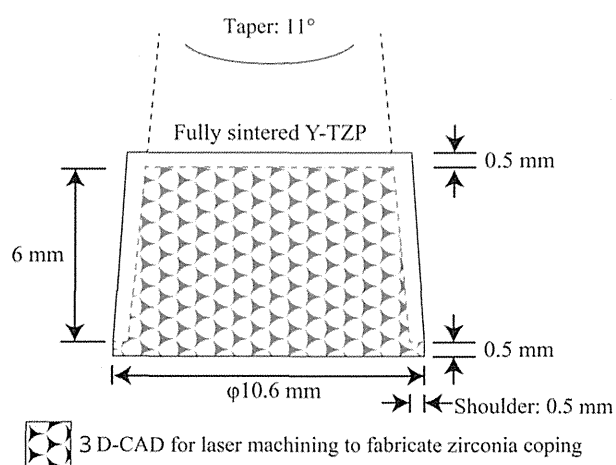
Dimensions of the fully sintered Y-TZP specimen simulating a lower first molar, and 3D-CAD for laser machining to fabricate zirconia coping.
